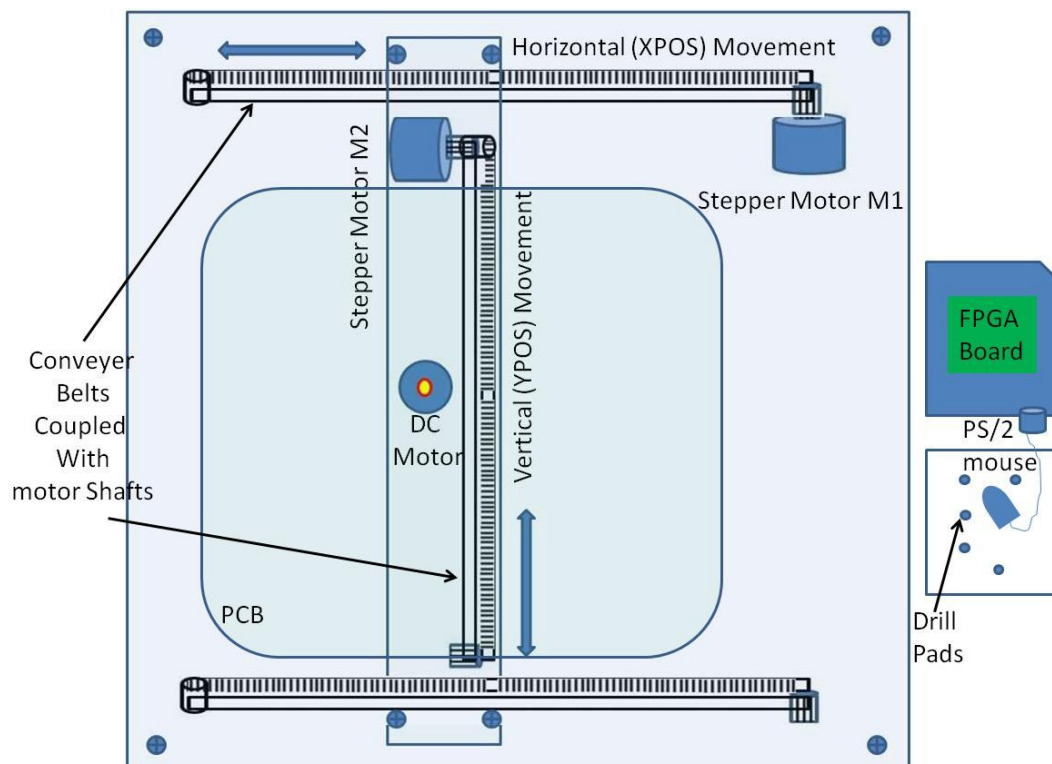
Prototype of Mechanical Setup of Mouse Controlled and FPGA based PCB Drill Machine
